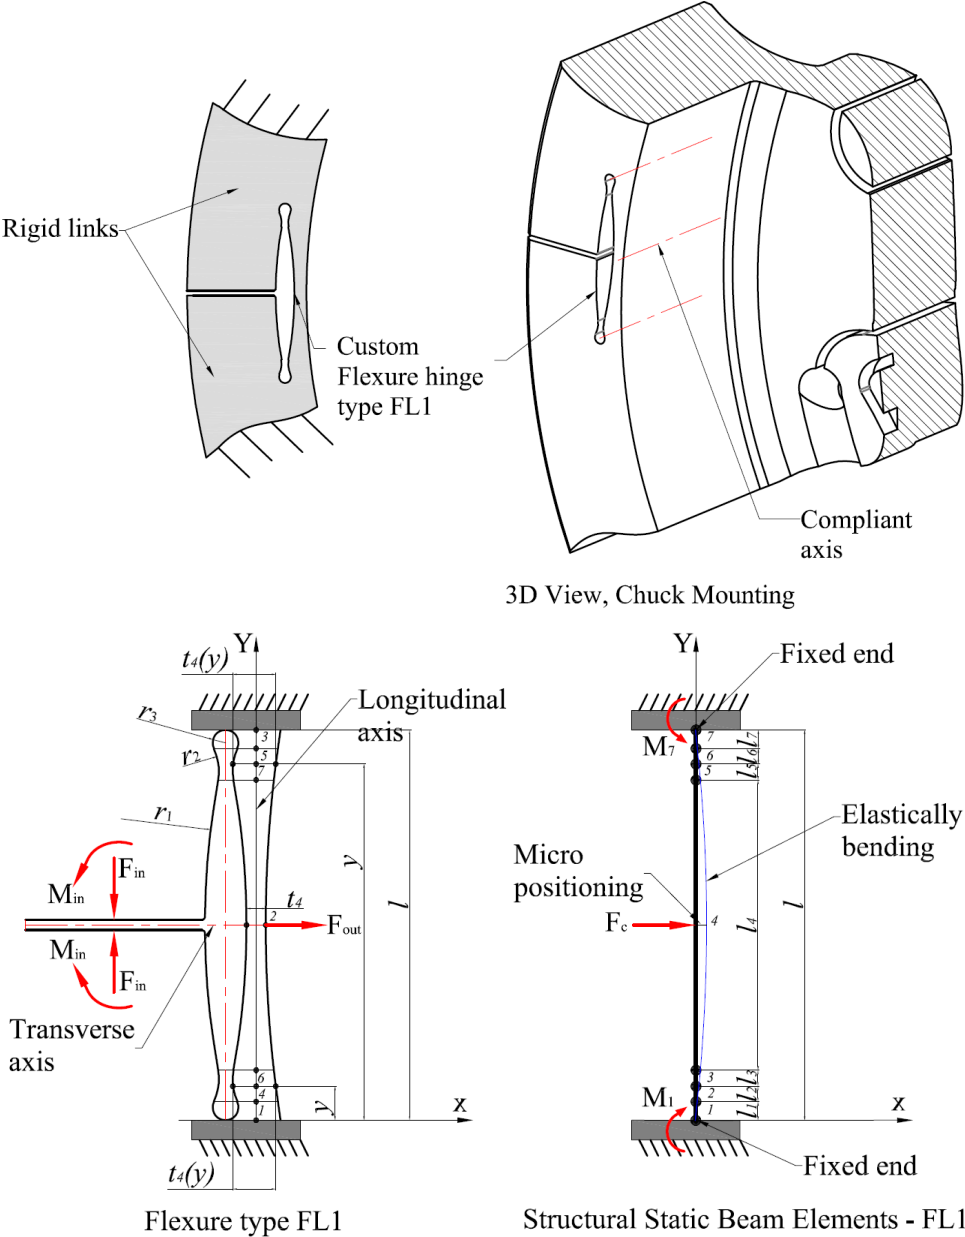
Flexure design, schematic view of flexure type FL1
